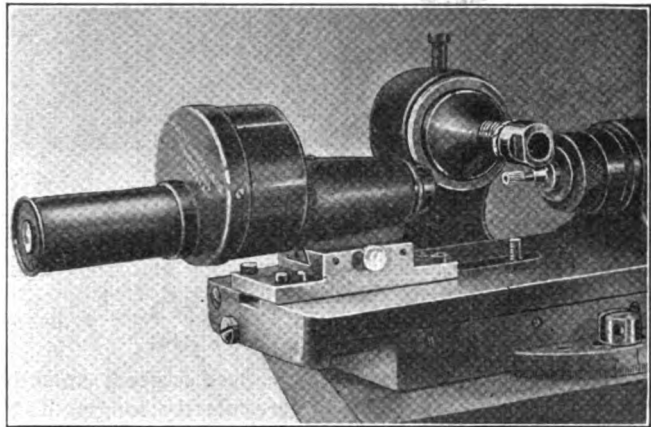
OLD TYPE OF PINION CUTTING MACHINE
